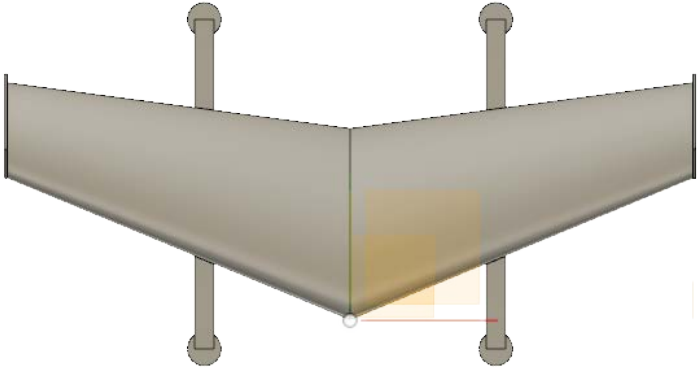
3D Structure of Front View designed using Auto Fusion 360
